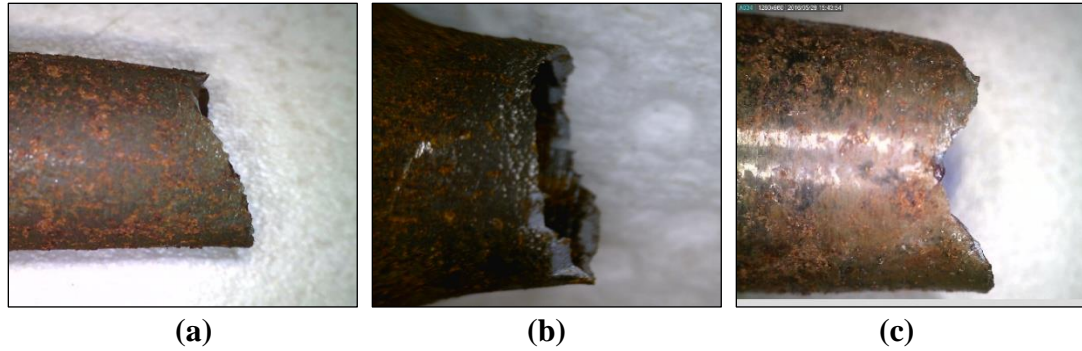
Crack features of specimens used in pressure holding tests: a) T-95-2; b) C-110-1; and c) Q-125-2
